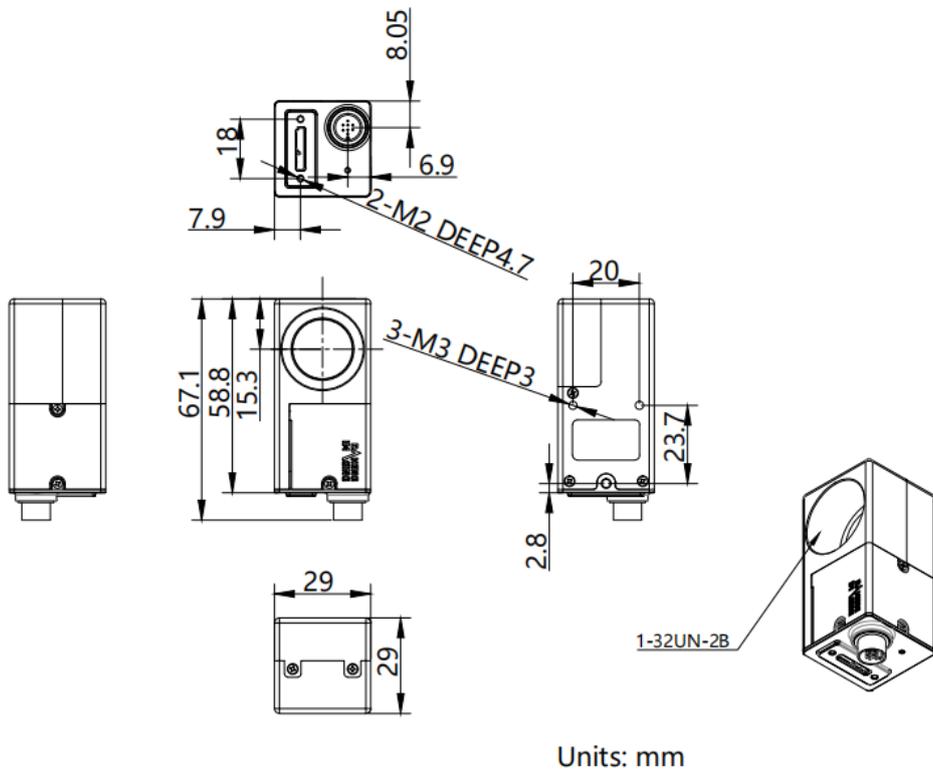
MER2-U3-W90-S90 mechanical dimensions
